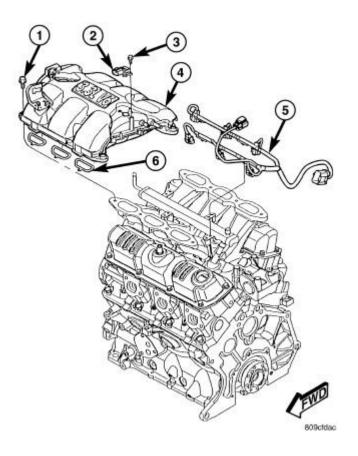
INTAKE MANIFOLD - UPPER Courtesy of CHRYSLER LLC
